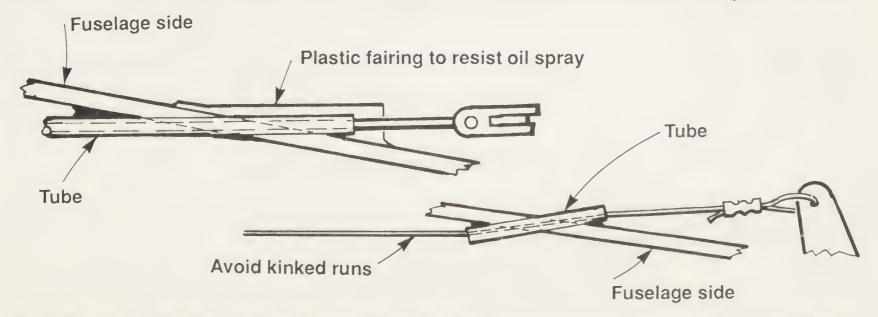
Using exit fairings. Tube outer end inside fairing gives maximum protection against oil etc.
